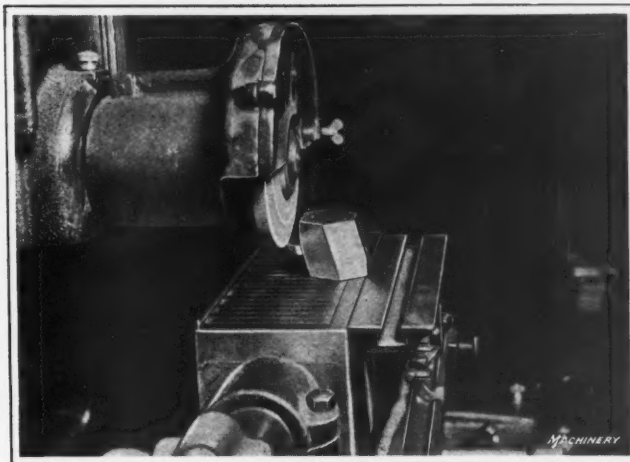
Grinding Top Face of Tool on Surface Grinder
